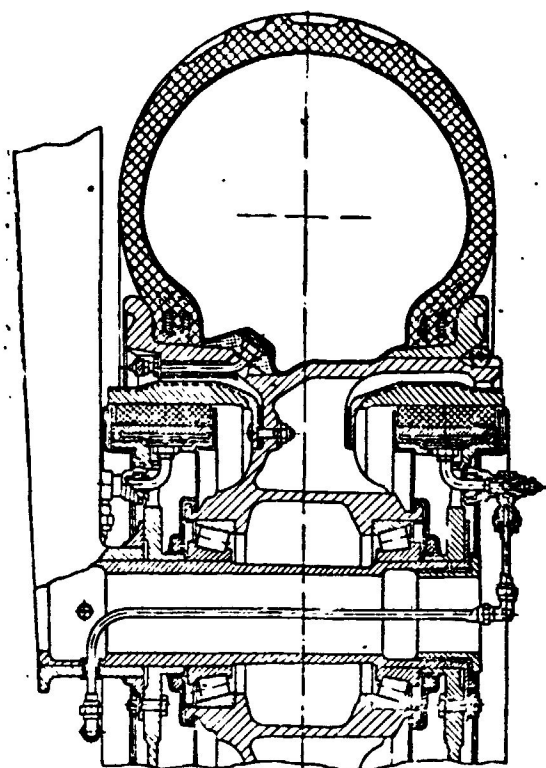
Installation of wheel with dual expander tube brakes on cantilever gear.
